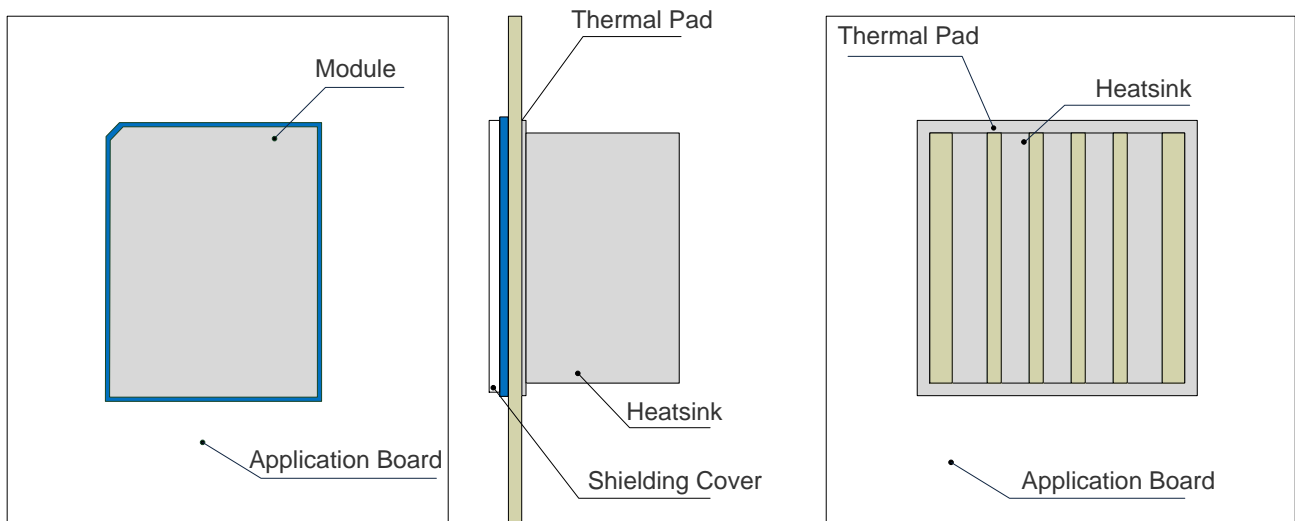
Referenced Heatsink Design B (Heatsink on the Backside of your PCB)
